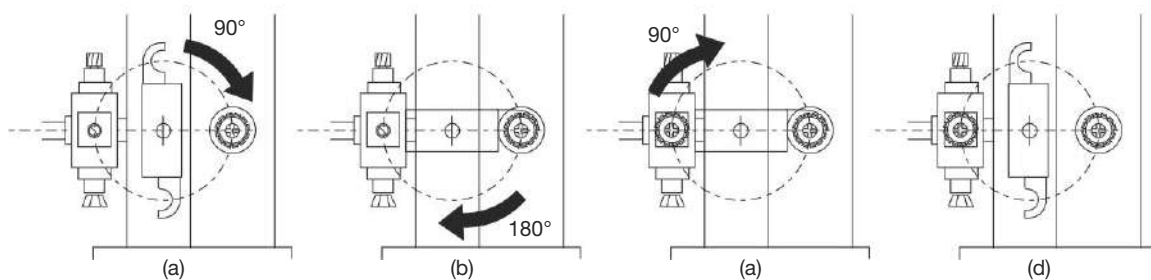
Tool-change procedure with a tool-change arm having a double gripper
